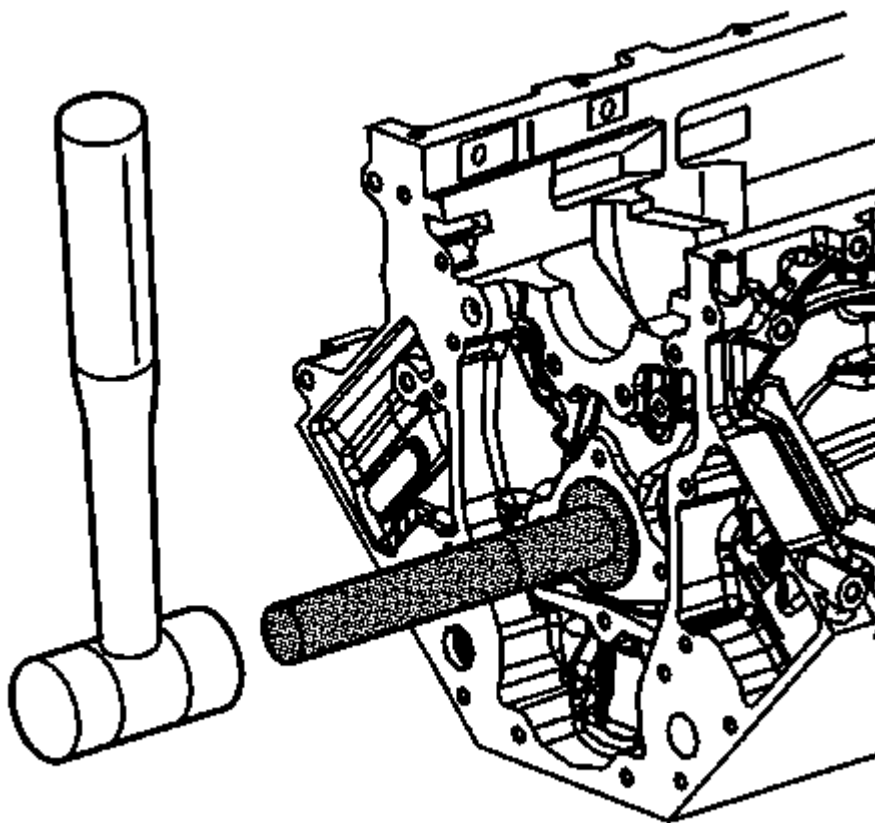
Driving Bearing Out Of Or Into Engine Block
